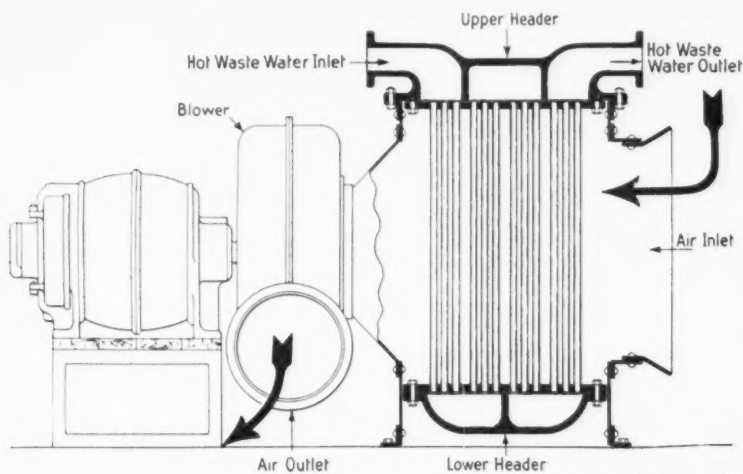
Sectional view of a Schutte & Koerting air heater. This device is adapted for use with live or exhaust steam, or hot water. As air passes through and across the tubes, it is divided into thin films. The tube arrangement reduces frictional resistance and sluggish air flow.
